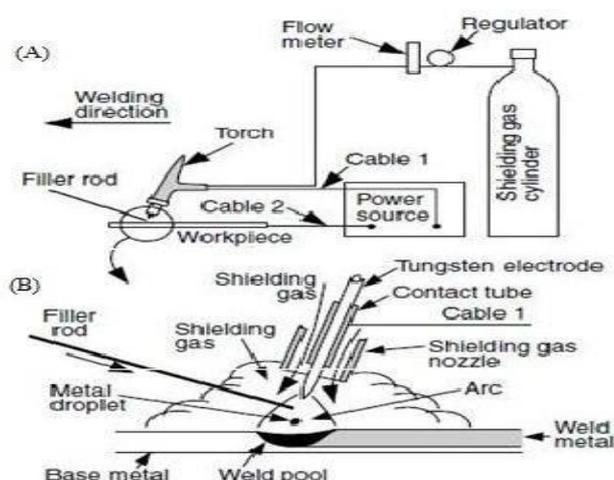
GTAW: (A) overall process, (B) welding area enlarged. [28]
